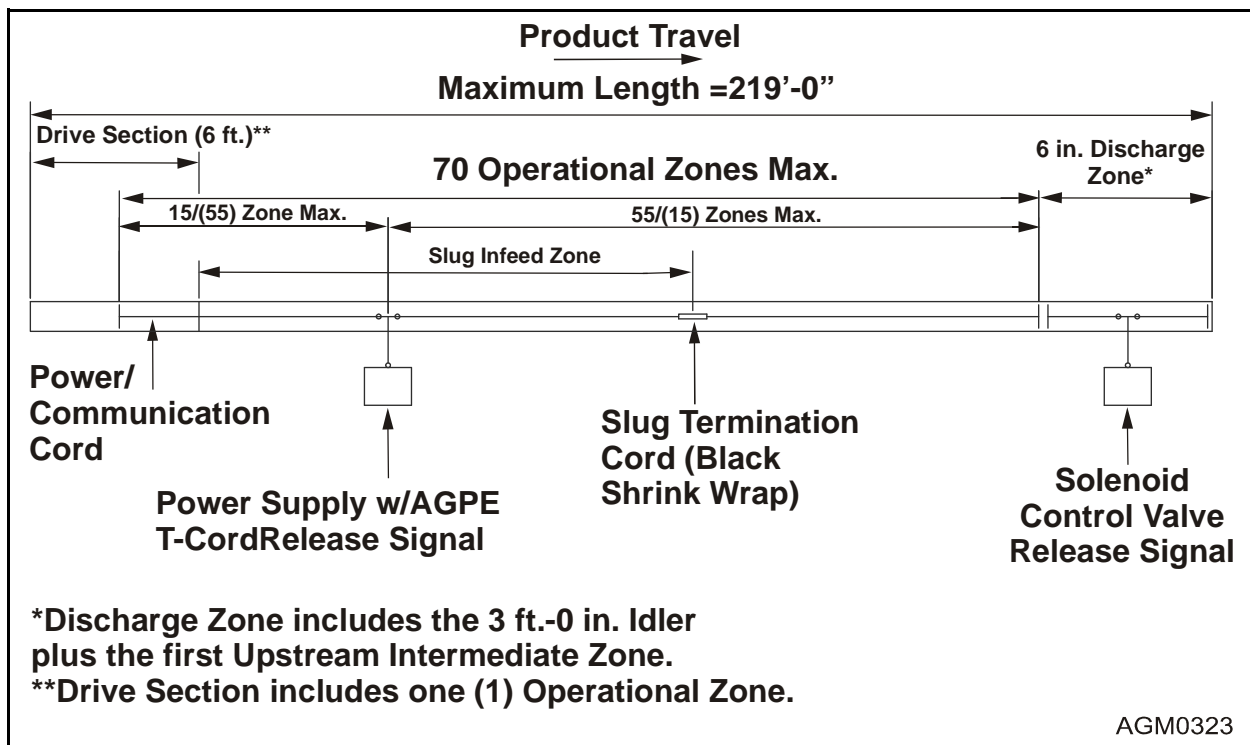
24 Slug-Infeed / Primary Mode Release (Single Power Supply)
